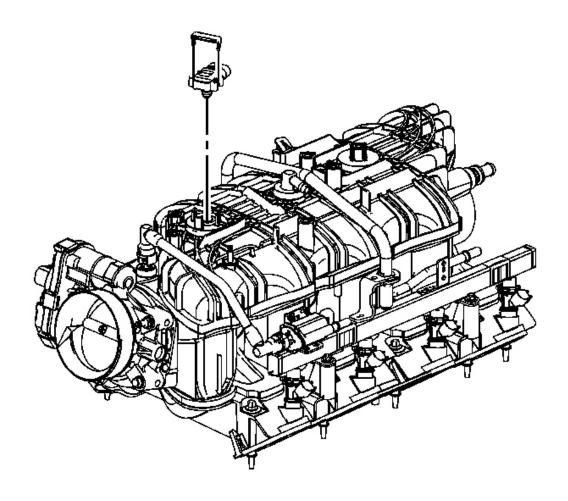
Manifold Absolute Pressure (MAP) Sensor Retainer Courtesy of GENERAL MOTORS CORP.
